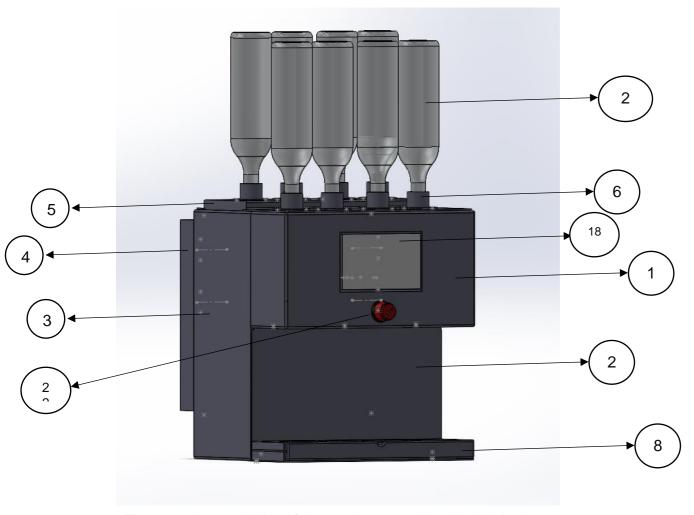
Isometric View of the complete assembly with eight bottles
